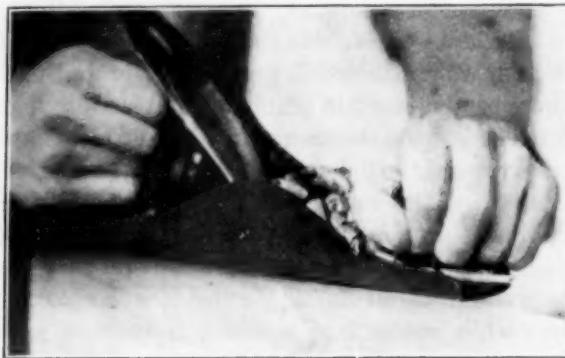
HOW TO PLANE THE EDGE OF A BOARD.
